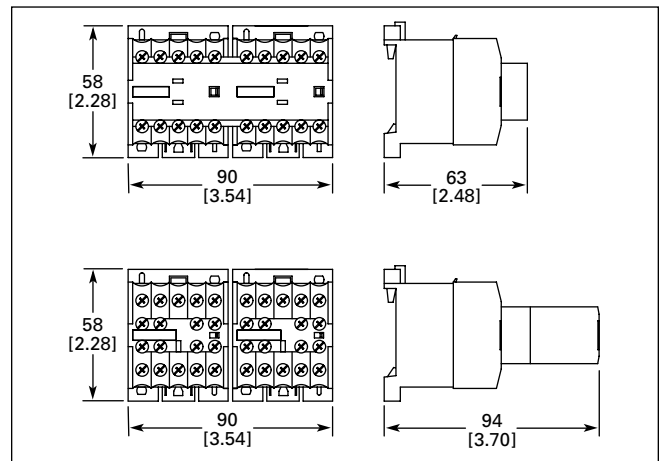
XTMCXML Mechanical Interlock — Approximate Dimensions in mm [in]
